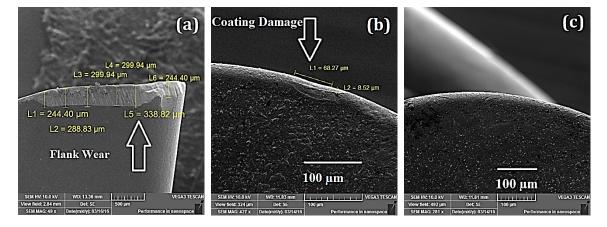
Flank wear in dry cutting (a), Tool wear using coolant (b), Cutting tool wear using cryogenic cooling (c)
